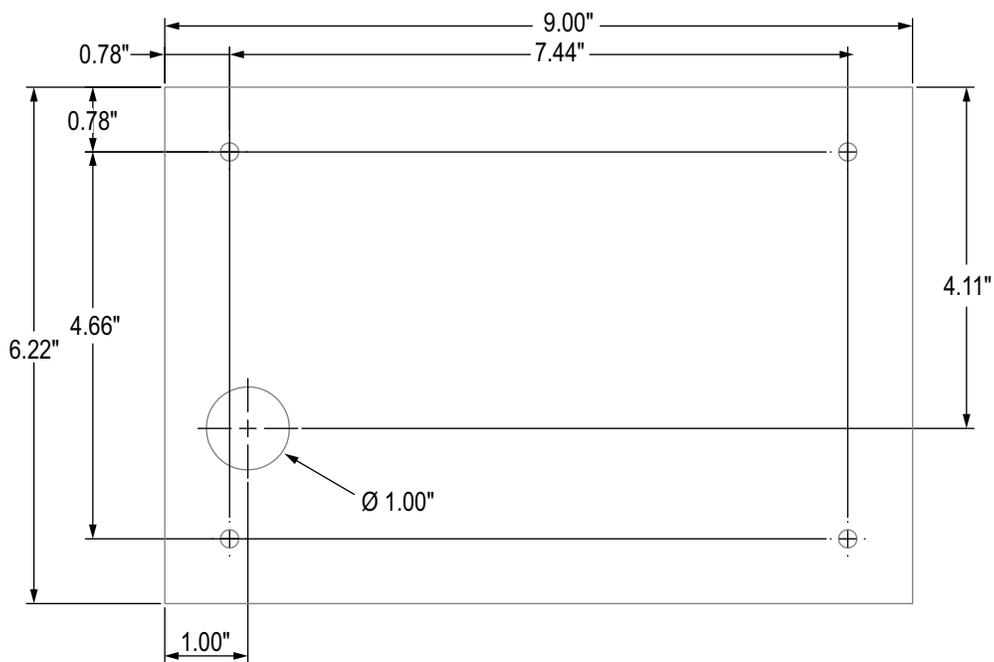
7" Touch Only Panel Mount Dimensions
